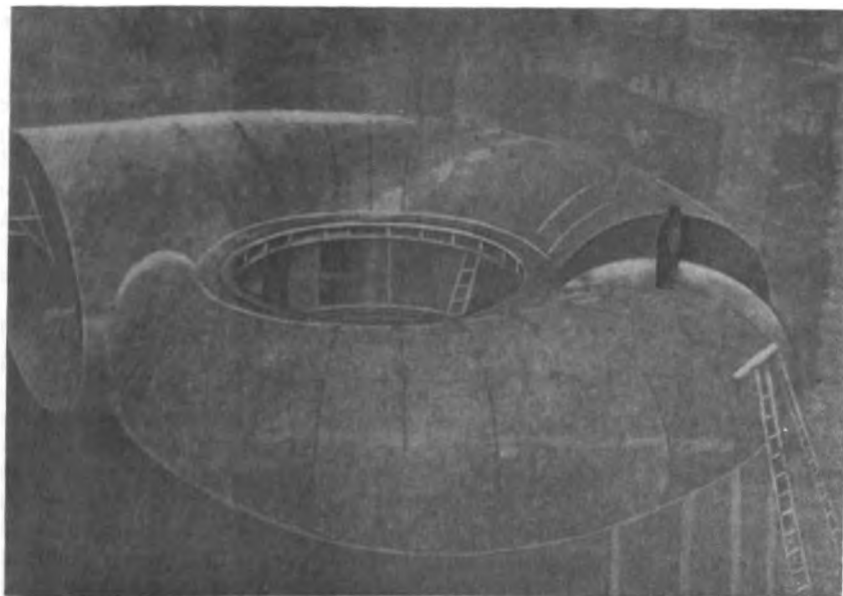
Assembly of a welded scroll casing
